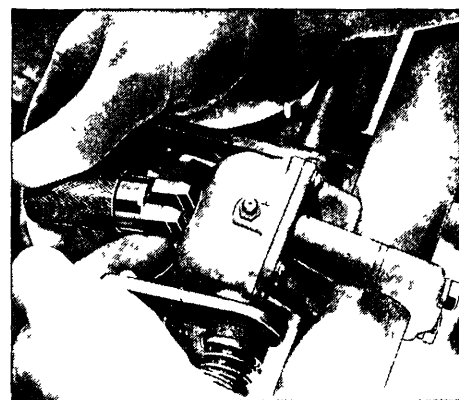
Gearshift adjusting gauge, 1939 Champion and all 1940-46
